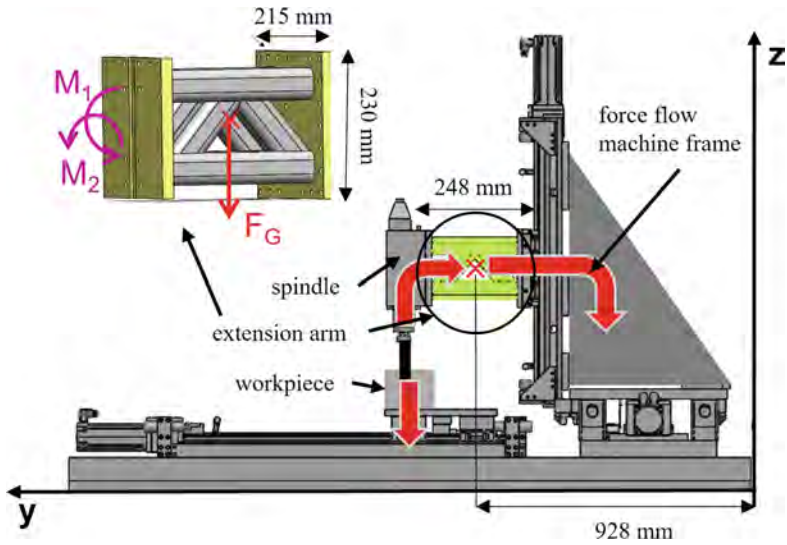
Force directions of a machine arm in a machine tool in console bed design
